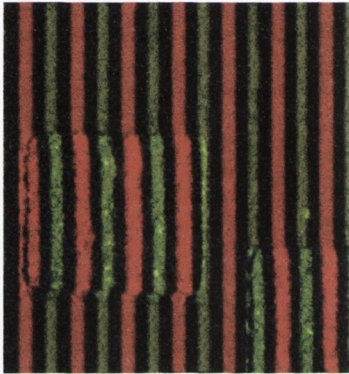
Solder Paste deposit with colour grating pattern.
